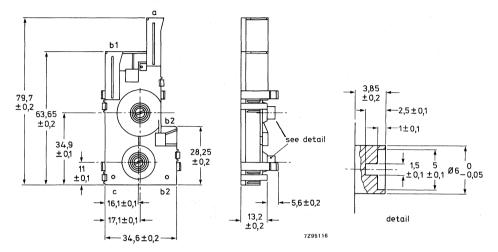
a = high tension; b1 = focus; b2 = V_{g2} ; c = earth. a, b1 and b2 are designed for wire carriers 4322 052 89140 or 88820 with wire ϕ 3,2 \pm 0,2 mm and ϕ 1,8 \pm 0,1 mm respectively. Wire carriers have to be ordered separately. Strip length for wires: 7 \pm 0,5 mm. c and b2 are designed for premounted contact pins ϕ 1 mm x 6 mm.
